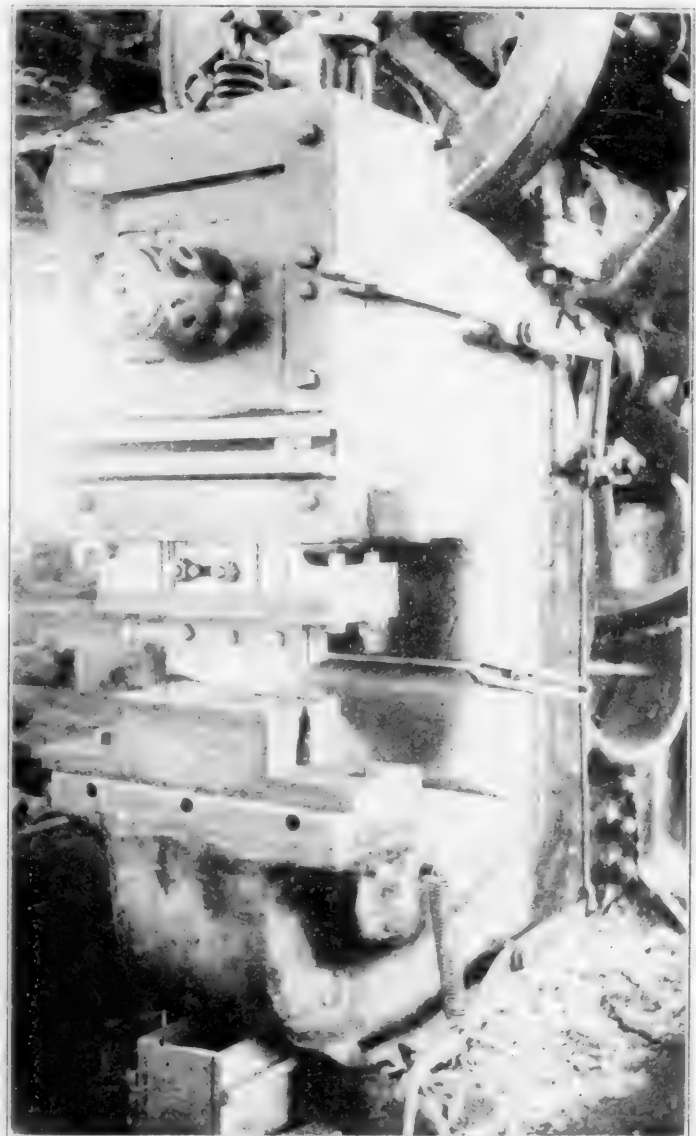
ATTACHMENT ON SHEAR FOR CUTTING BRAKESHOE KEYS TO SHAPE.
